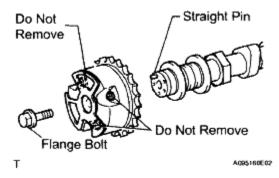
Removing Flange Bolt And Camshaft Timing Gear
